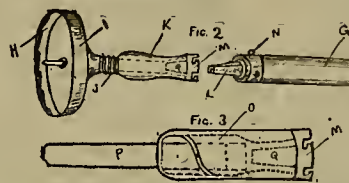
G, Flexible shaft. H, Cutting drill. I, Casing for cutting drill. J, Spring to adjust the casing. K, Handle. L, End of flexible shaft. M, Interchangeable sleeve. N, Sleeve fasteners.
